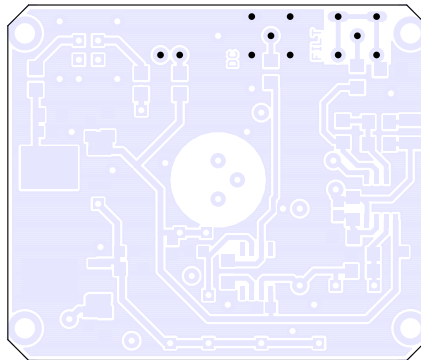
Board bottom view showing drills with ≈ 0.9 mm (≈ 0.03543 in) diameter (12×889 μm)
